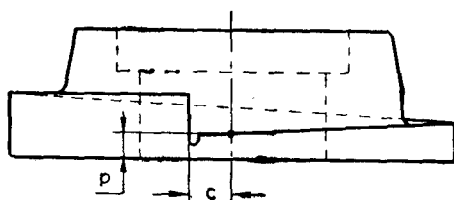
SEATING FIXTURE FOR COIL COMPRESSION SPRINGS HAVING ENDS WITH TANGS
